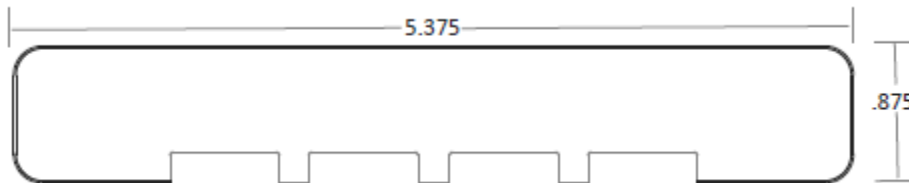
ENDECK® AIR STRAIGHT EDGE DECK BOARD
